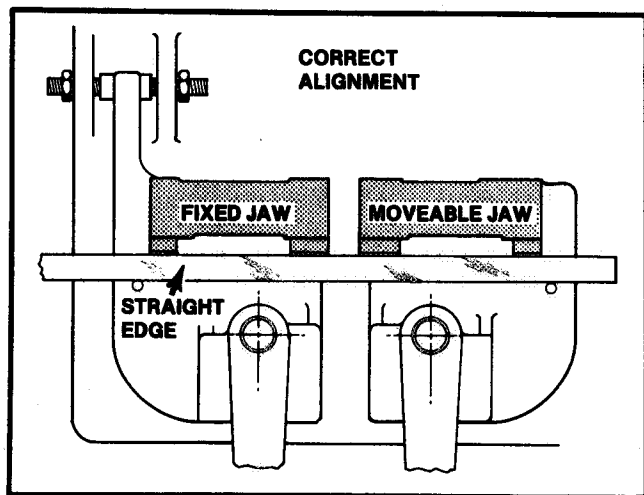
CORRECT WELDER JAW ALIGNMENT.
